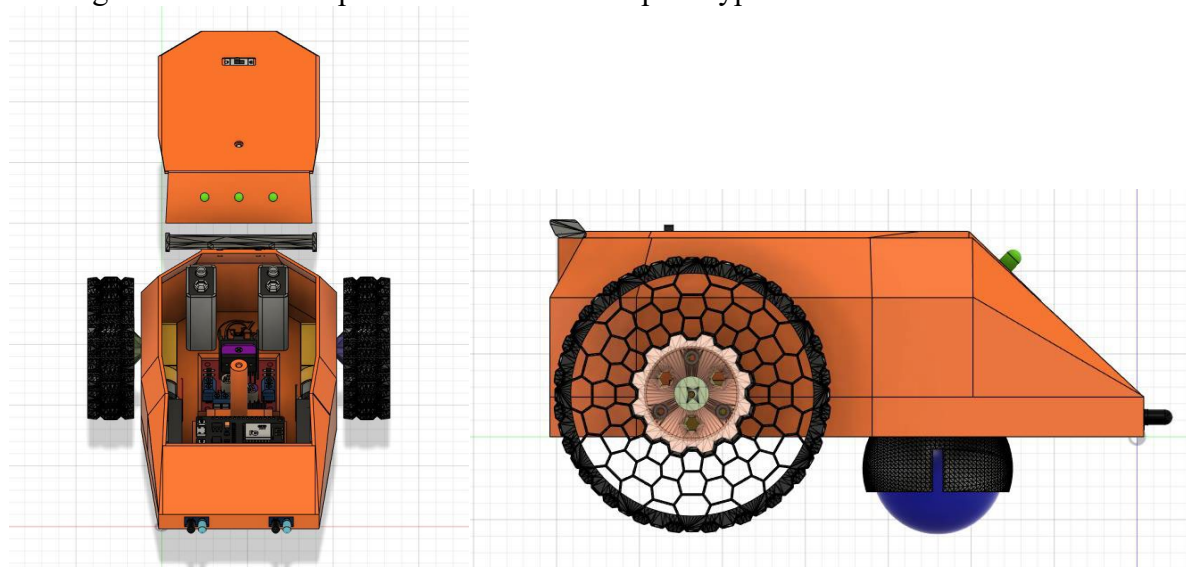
Completed 3D model of a prototype mobile wheeled robot
